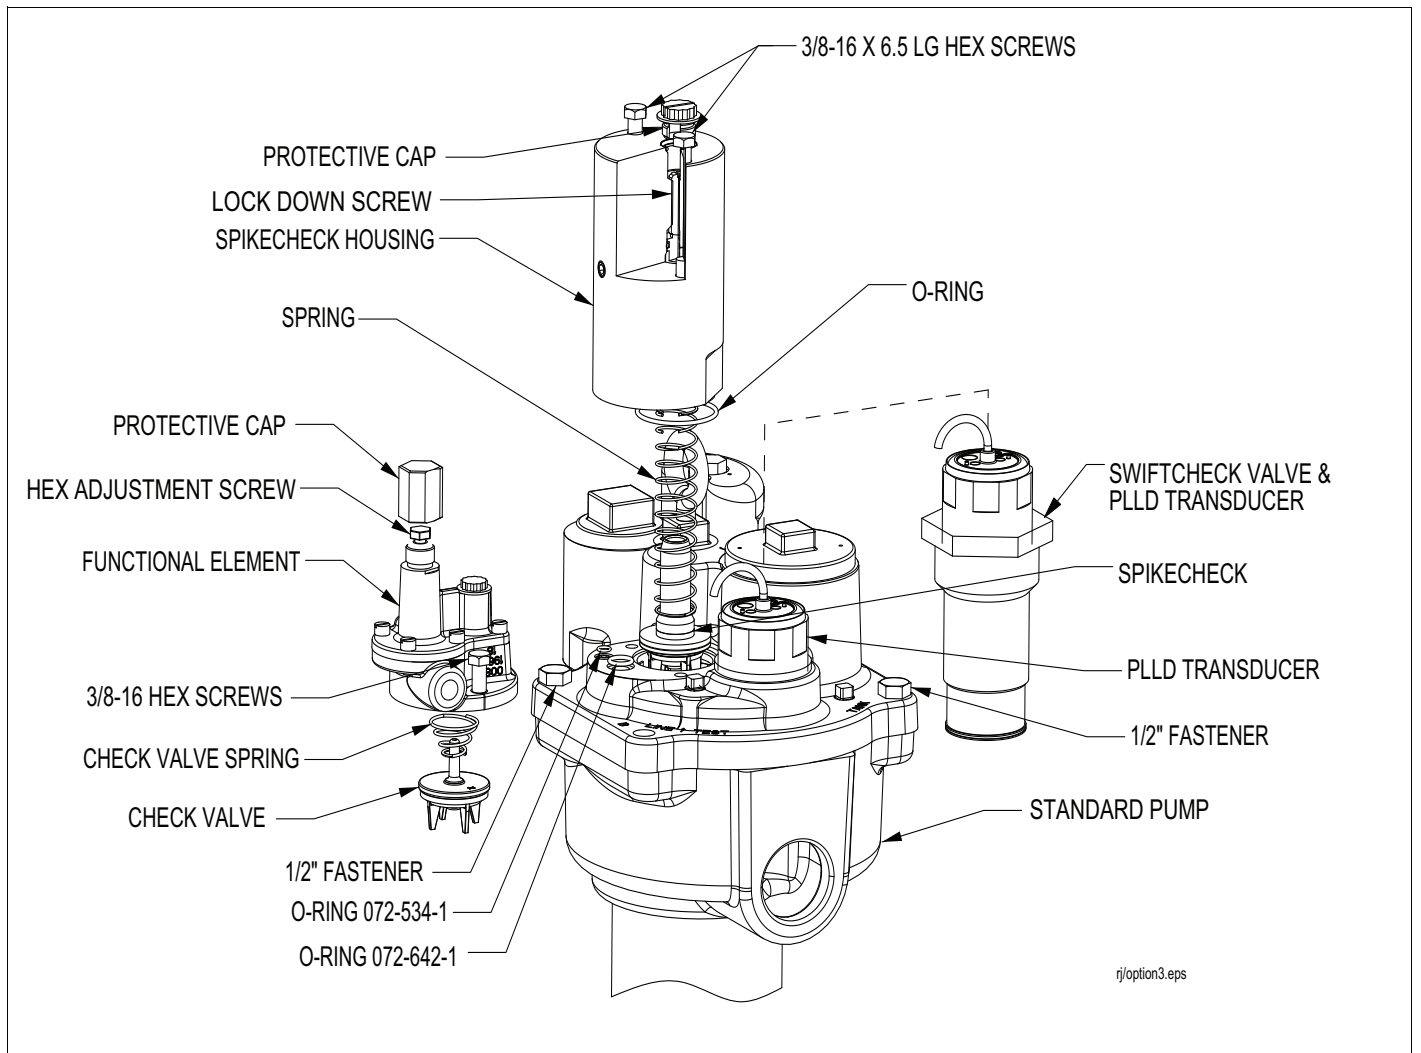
Option 3 – Converting a Standard Packer/Manifold Containing a SwiftCheck Valve and PLLD
